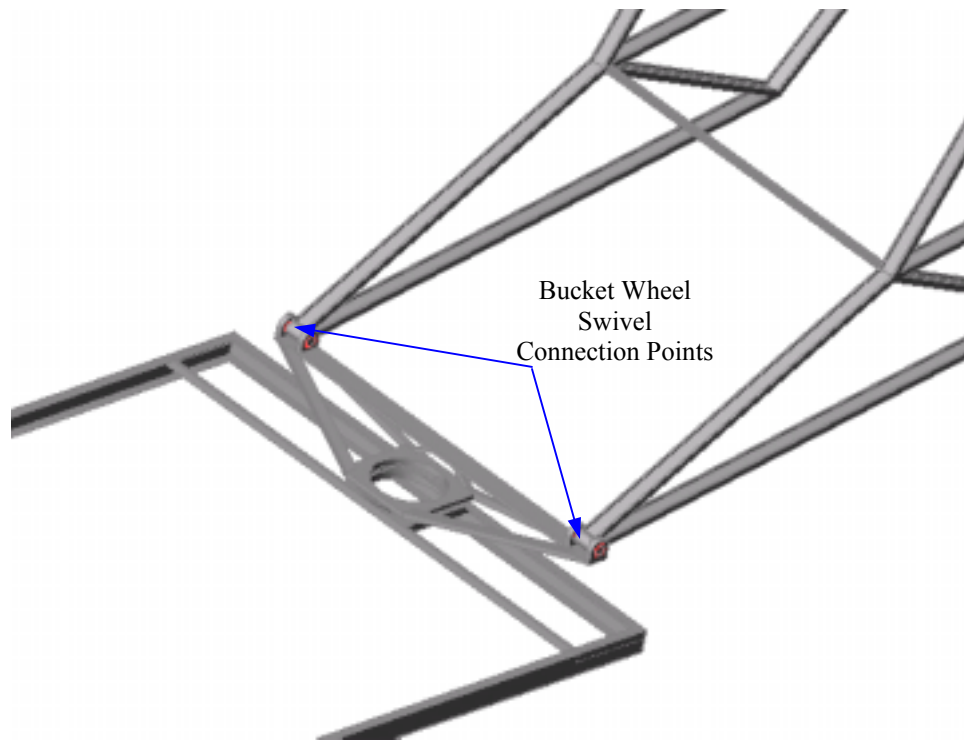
Bucket wheel support and swivel attachment to the BW frame and chassis
